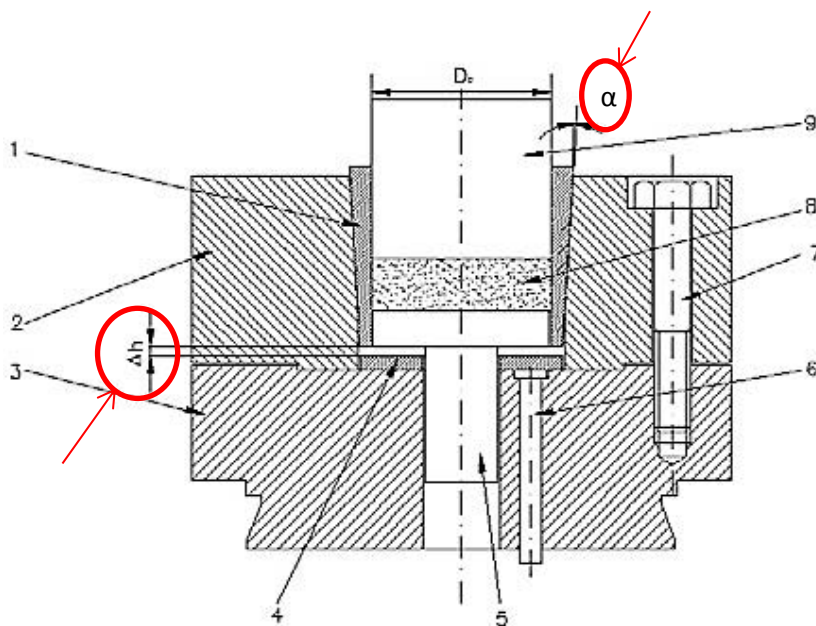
Conical die concept. 1-sleeve; 2-die body; 3- lower die body; 4-spacer disc; 5- lower punch; 6-ejection pin; 7- die assembly bolt; 8- part; 9- upper punch (Noveanu & Frunză 2013).
